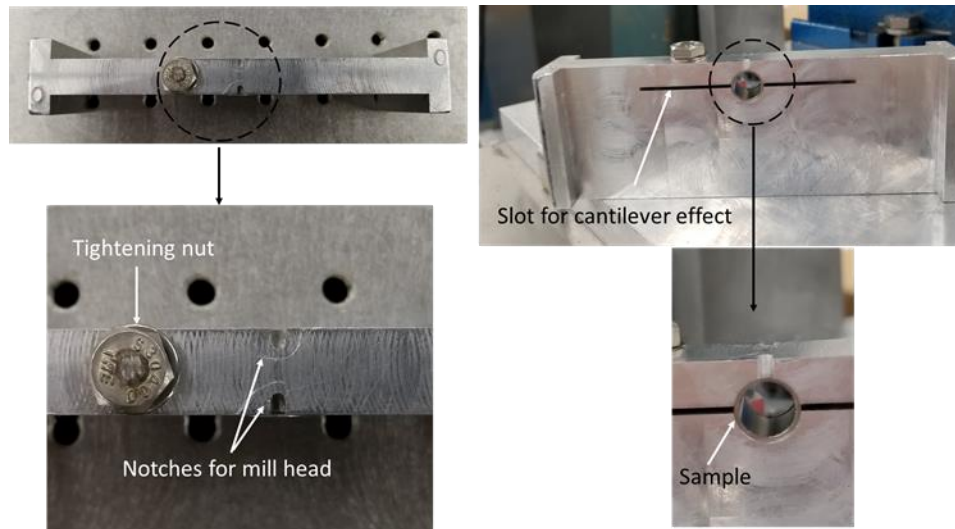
Part for milling a double-edge notched specimen for PST tests.
